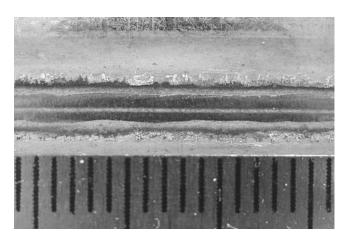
Surface appearance of a diode laser lap weld on Al spray coated steel sheets, similar to Fig. 10 except 1.1 mm hot dip galvanized sheets with G170–70 g/m² zinc coating. Welding speed was 0.55 m/min.
